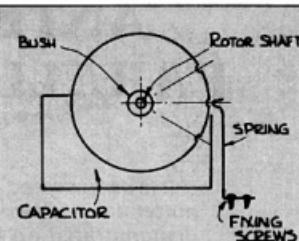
Clicker Plate for C1. (The clicker plate could be made from brass sheet and soldered onto a bush fitted with a grub screw to facilitate fitting on the rotor shaft...Tech Ed.)
